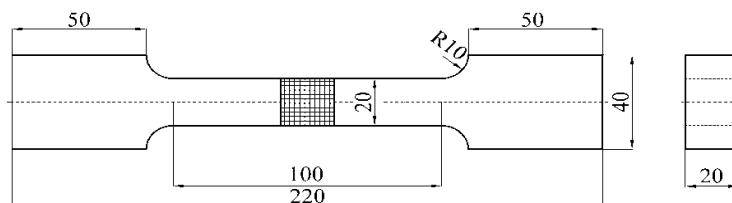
Specimen for determining of tensile properties of a butt welded joint [8]
